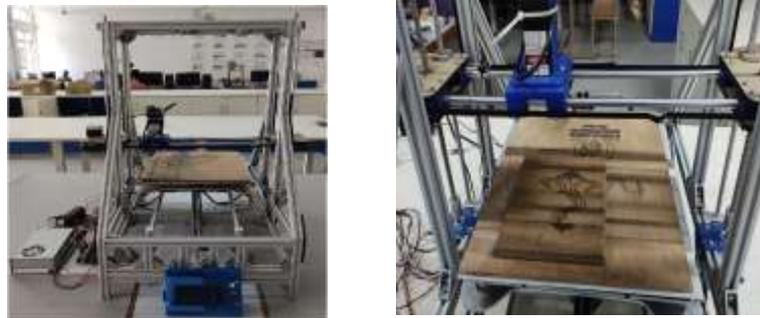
Laser Engraving Setup Modules For Multipurpose Cnc Machine.
